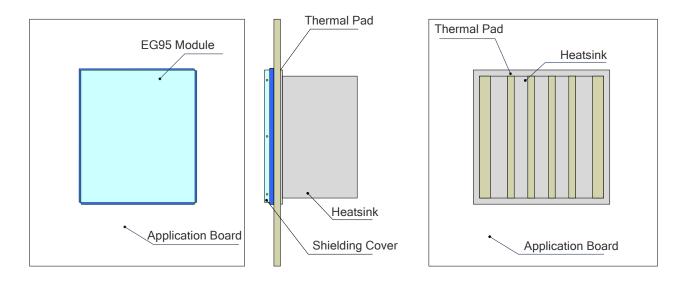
Referenced Heatsink Design (Heatsink at the Bottom of Customers' PCB)
